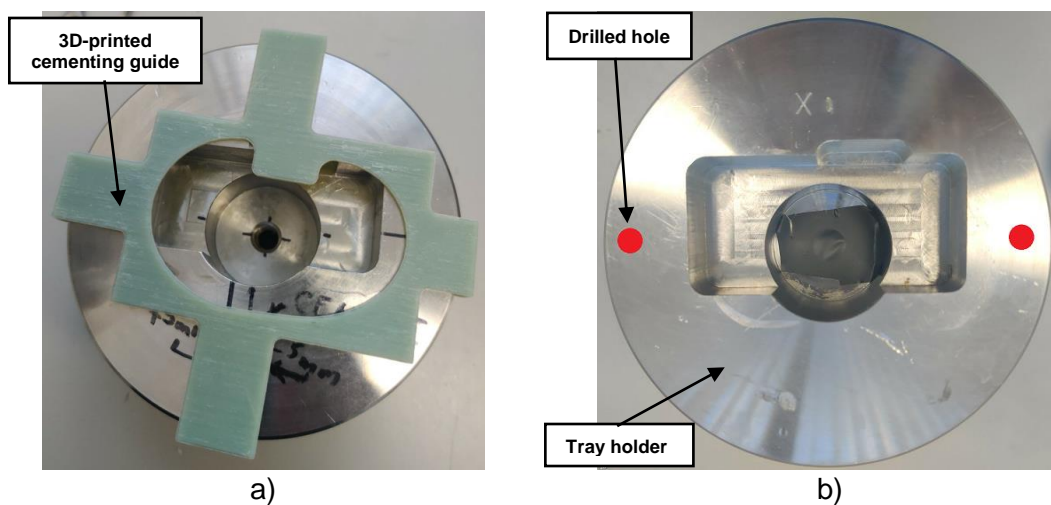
An attempt was made to design a) a 3D-printed cementing guide which would help with alignment during the cementing procedure. However, the 3D-fixture could not be used because the tray holder had no geometrical features to restrict I-E rotation. A potential solution could be to b) drill two holes (shown as red dots) on the top surface to provide fixating points for any 3D-printed guide.
